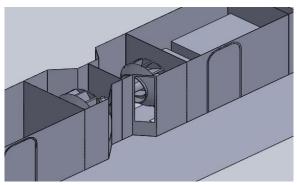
, Placement of machine, gearbox, impeller for lift, impeller for thrust, and stand (isometric view)
